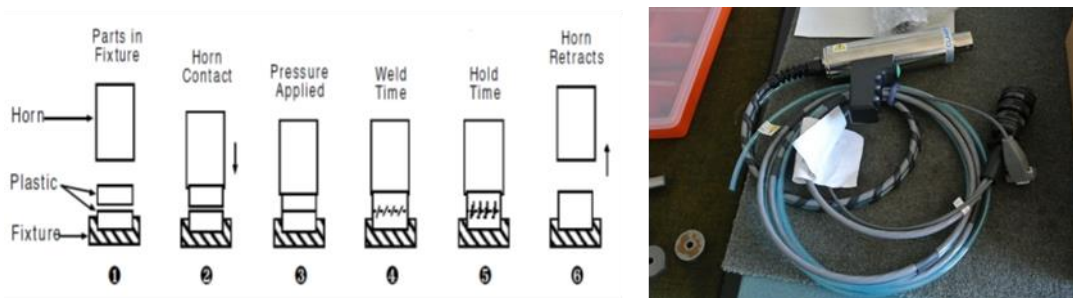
Schematic representation of ultrasonic bonding process (*left*) and photograph of handheld PT-350 welder used to do ultrasonic bonding tests (*right*)
